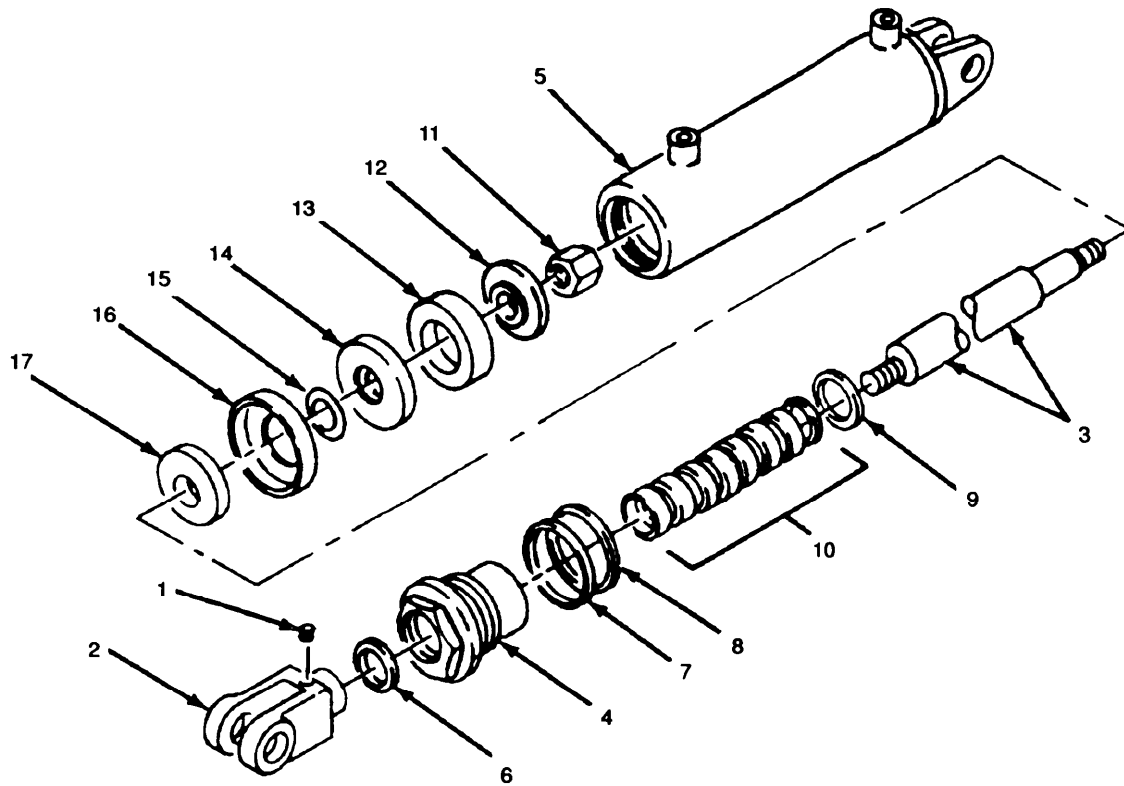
Cylinder Assembly (Locking Cylinder), Repair.
